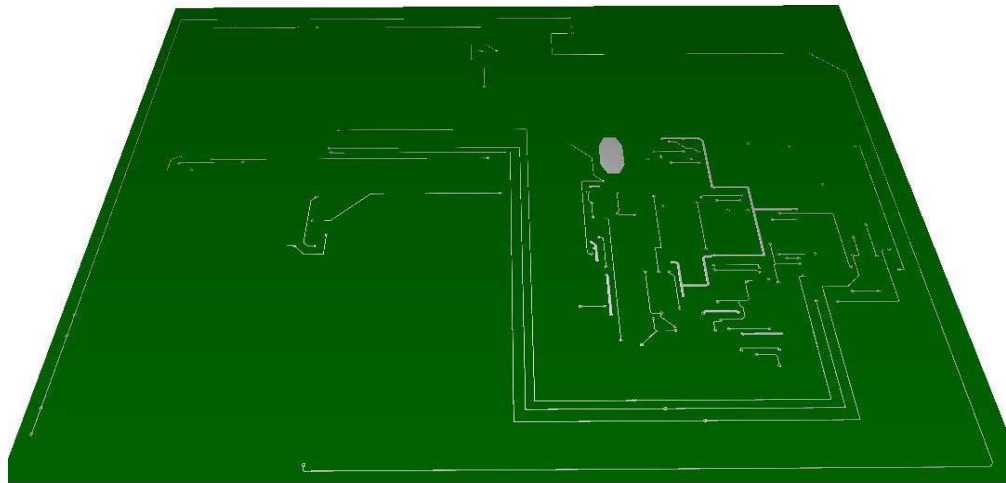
3D dimensional image of the complete layout- Bottom layer
